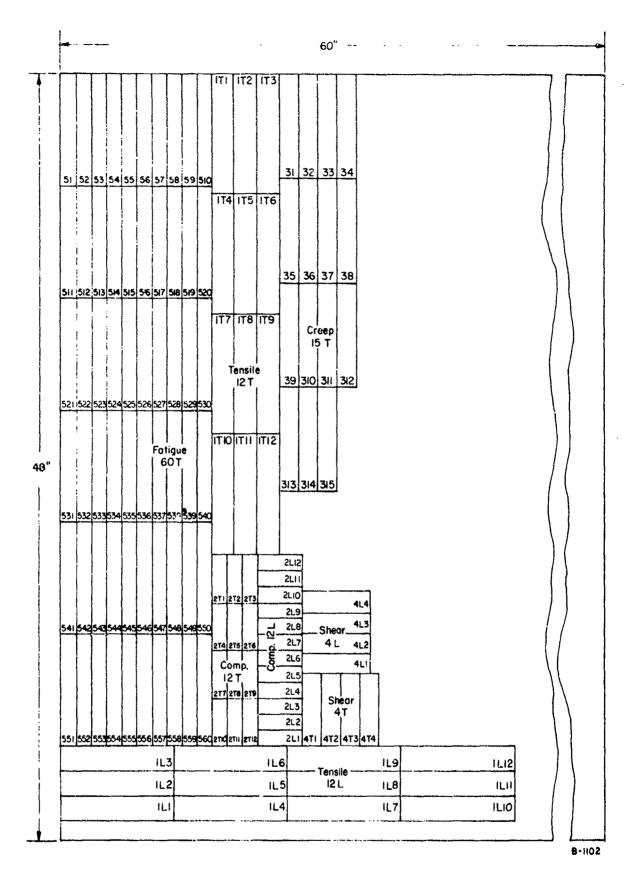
SPECIMEN LAYOUT FOR TI-6-2-4-2
